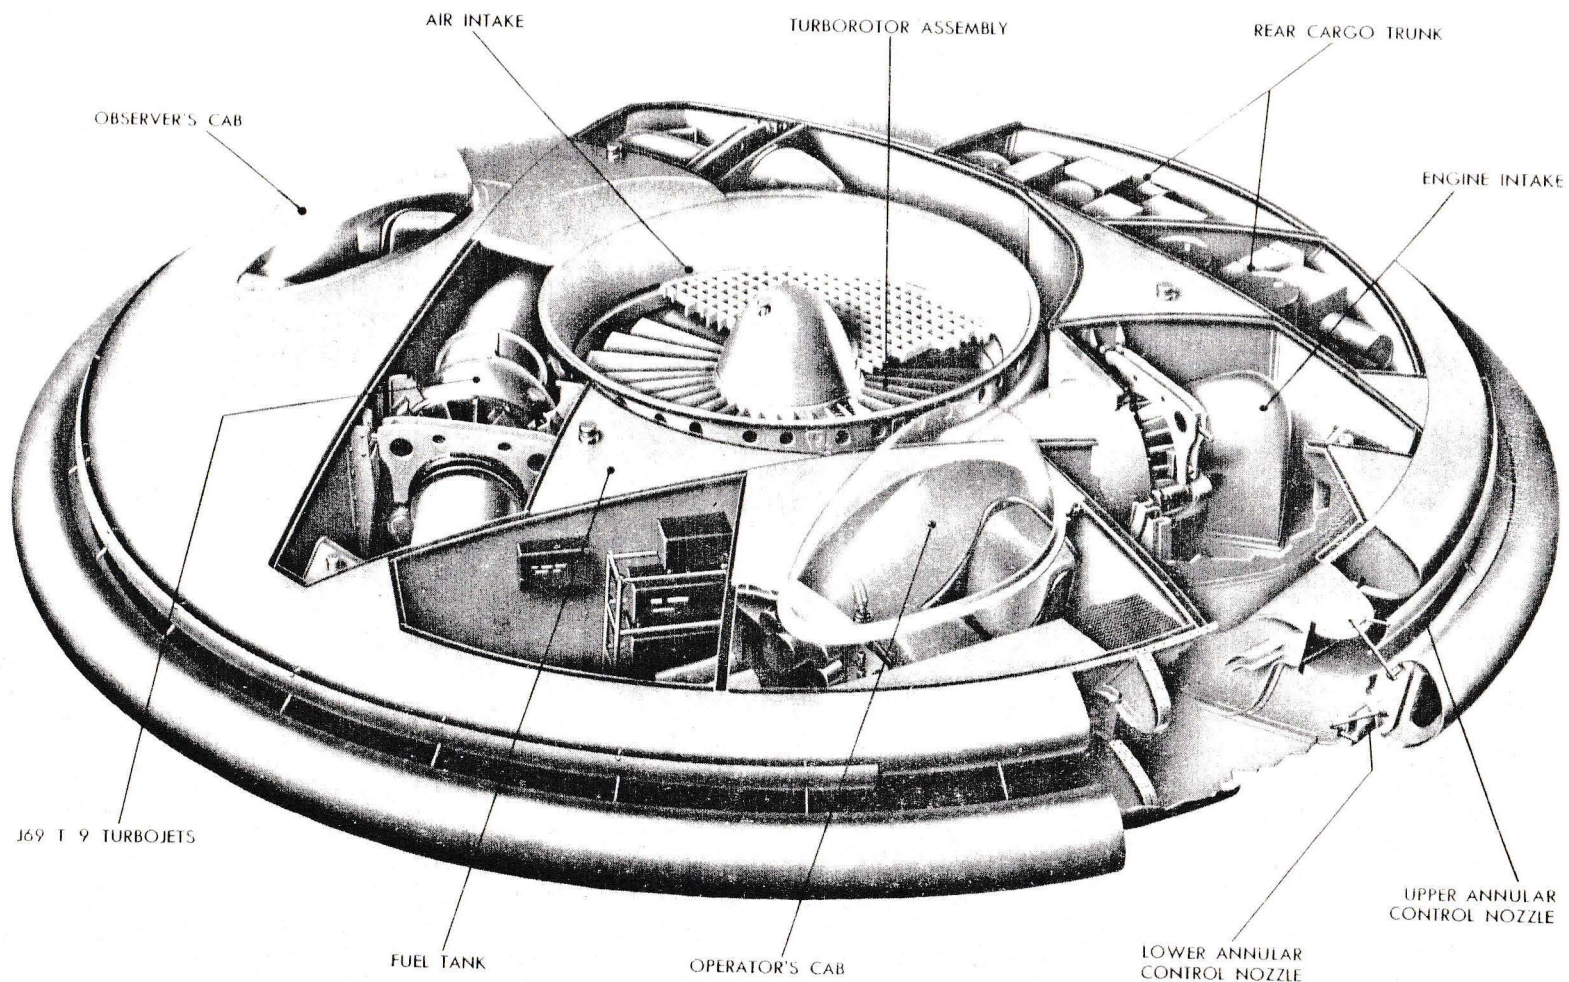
TEST VEHICLE - STRUCTURE CUTAWAY
